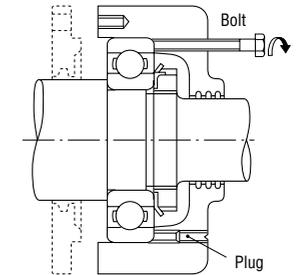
Removal of Outer Ring with Dismounting Bolts
